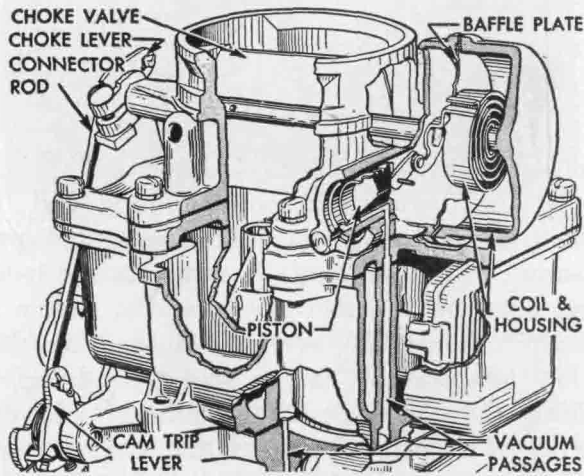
Carburetor cut away so the automatic-choke construction can be seen. (Buick Motor Division of General Motors Corporation)
